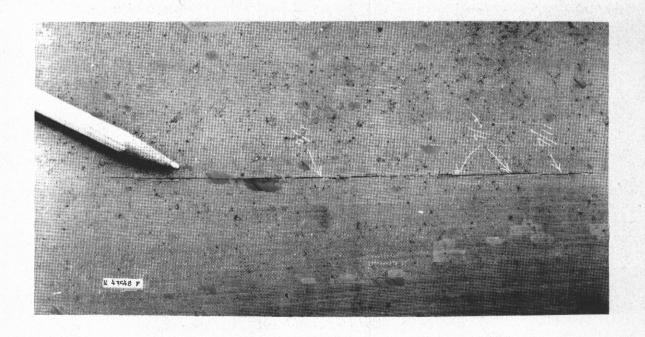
Leading edge 6C, showing crack that opened after 2 days' exposure.
